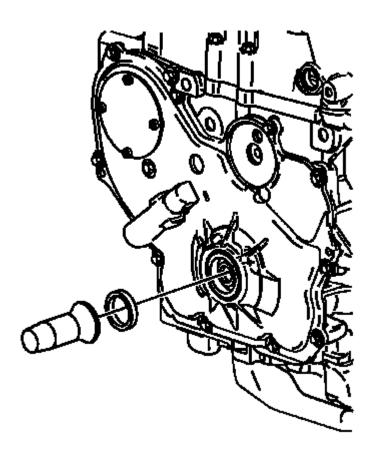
Front Crankshaft Seal And Installer Courtesy of GENERAL MOTORS COMPANY
